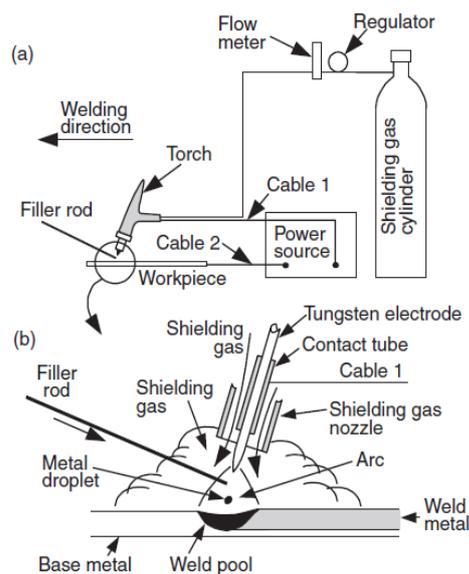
Gas–tungsten arc welding: (a) overall process; (b) welding area enlarged.
